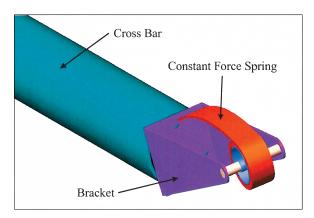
Assembly of a constant force spring and a bracket to the cross bar.
